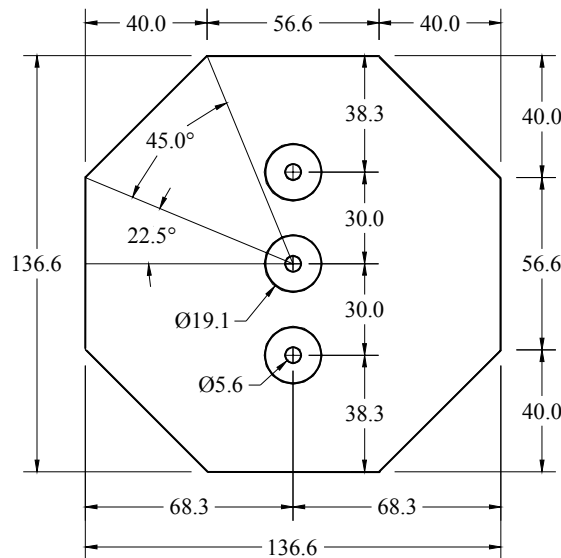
Dimension of the toroidal dies and die plate (thickness: 19.1)(unit: mm)
